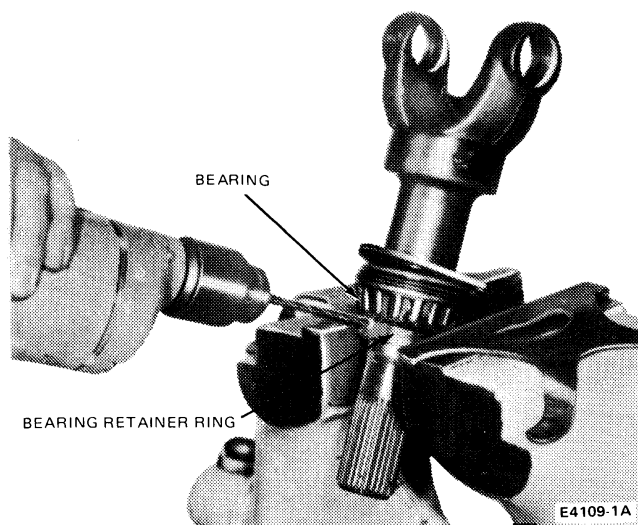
Drilling Stub Shaft Bearing Retainer Ring
